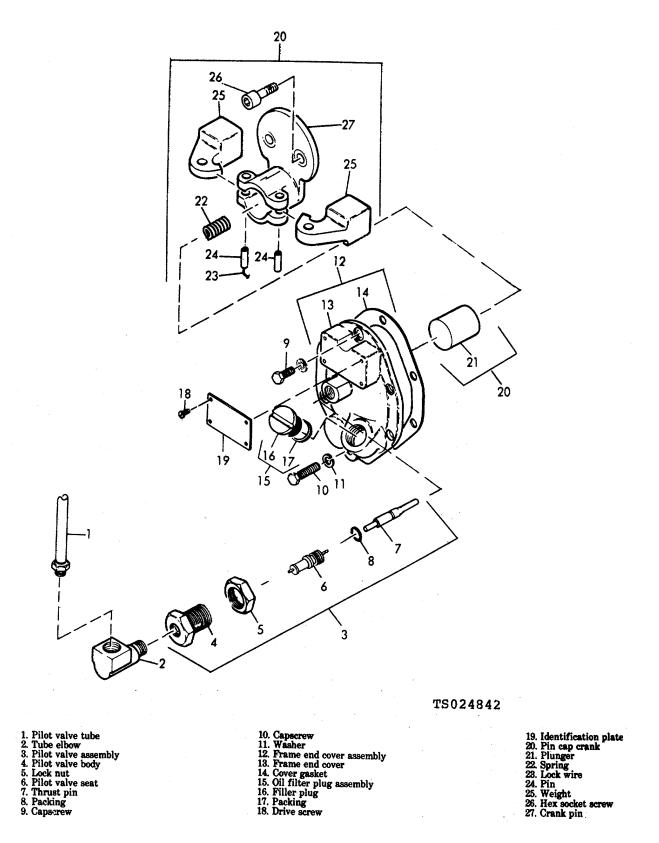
Pilot valve, centrifugal unloader, and frame end covers, exploded view.
